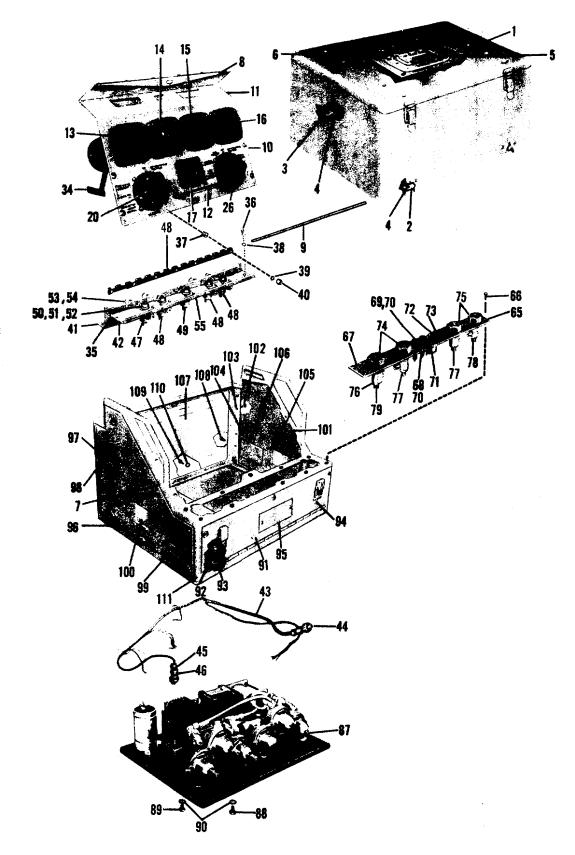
Vacuum Pressure Test Set (Sheet 1 of 2)
